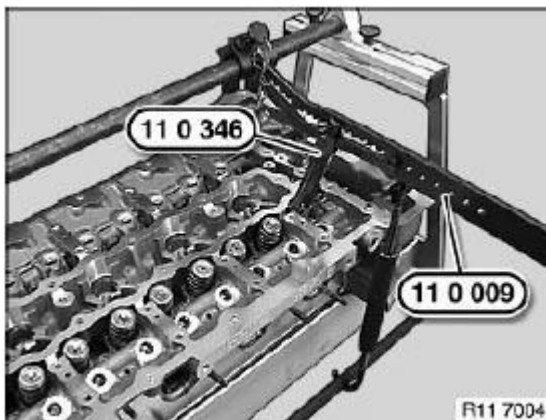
Pressing Valve Spring Down On Spring Retainer With Special Tools 11 0 009 And 11 0 346
